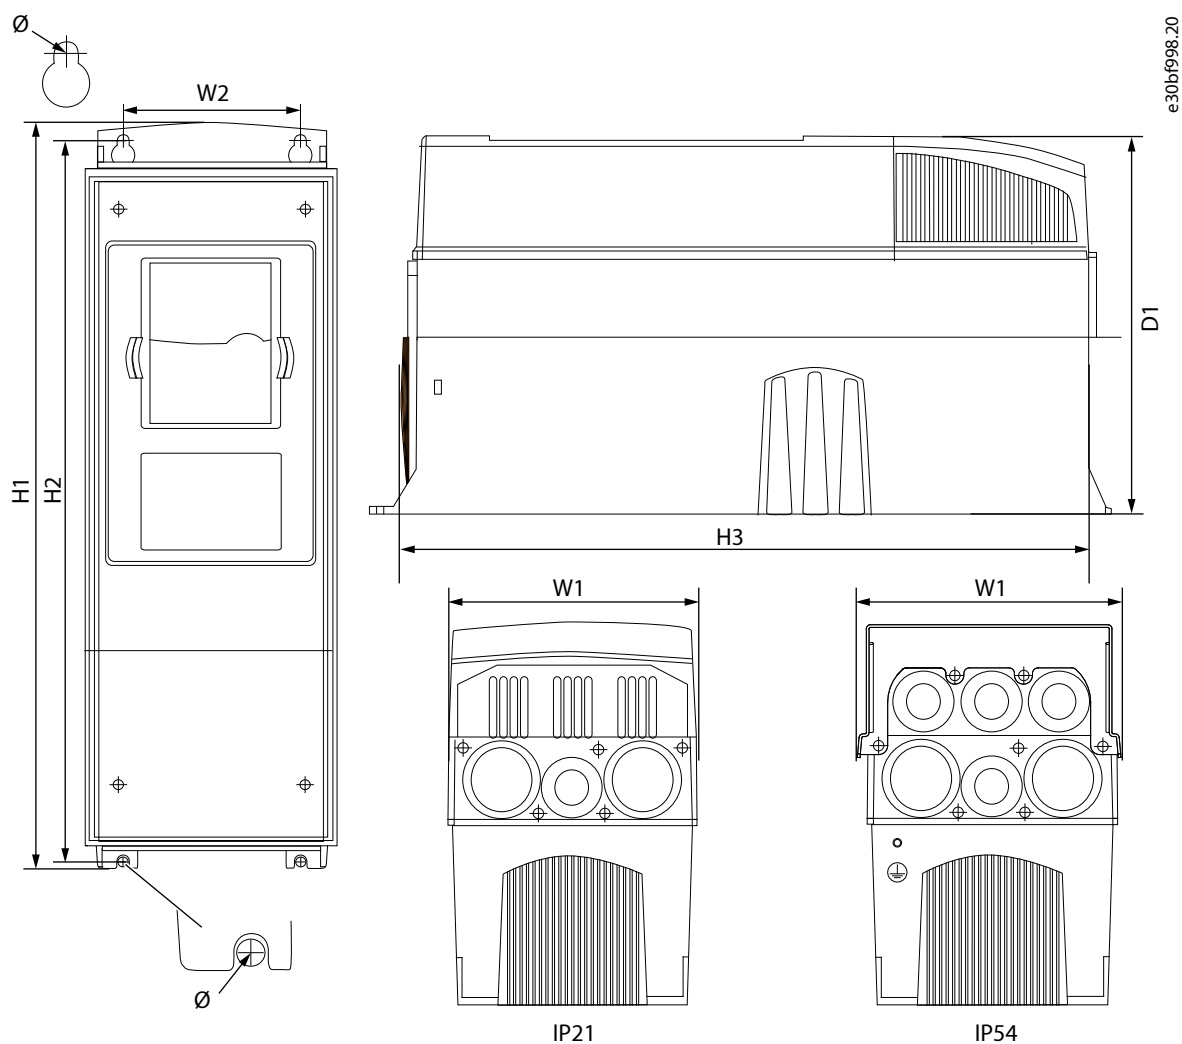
Dimensions of the VACON® NX Inverters, FI4–FI8
